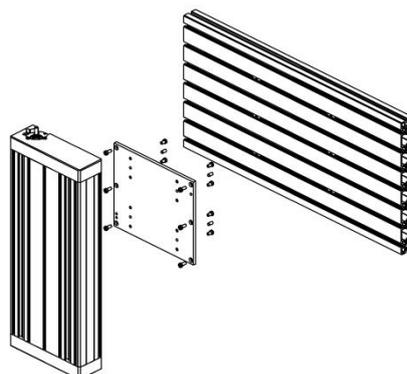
linear unit LES 4, 5, 6 for slide plate mounting - frame
